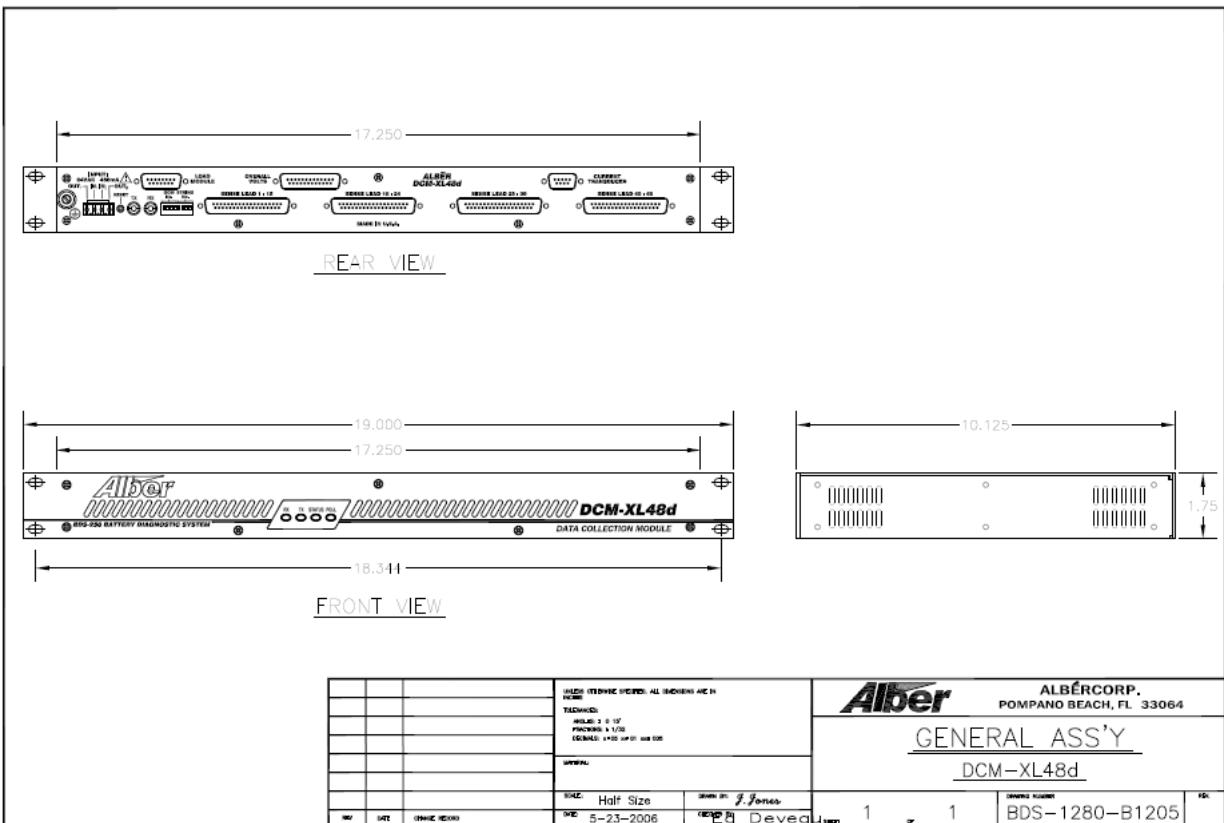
BDS-256XL Front and Rear View General Assembly DCM-XL48d Drawing
